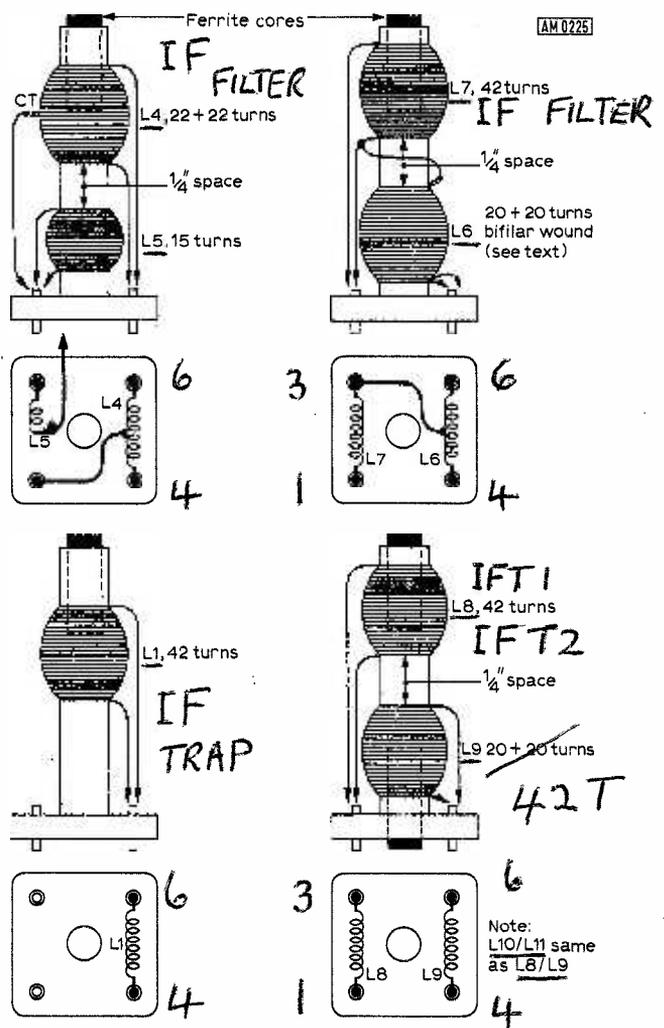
Details of the windings for the filter and IF transformers and the IF trap. The former length is 1 3/4 in. and not 1 1/2 in. as shown in components list.
